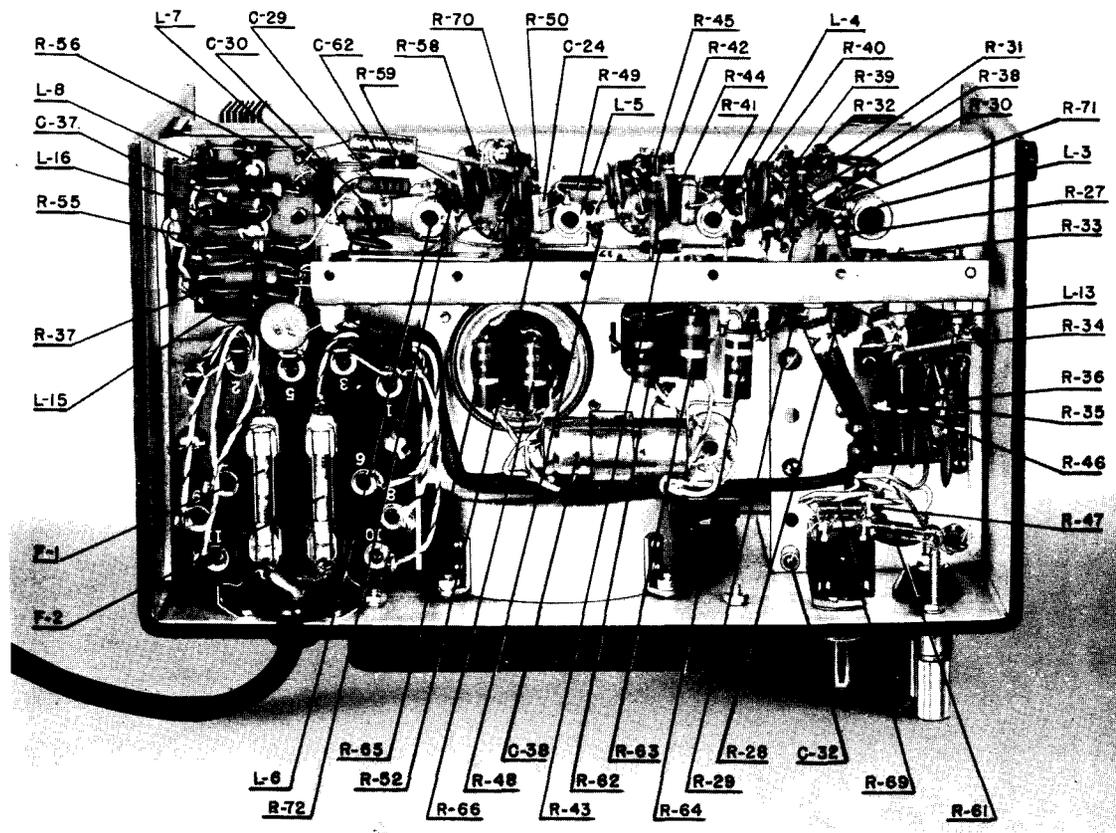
View from below with the shields removed. The i-f amplifier section extends along the rear of the chassis and is normally completely enclosed in a shield.
